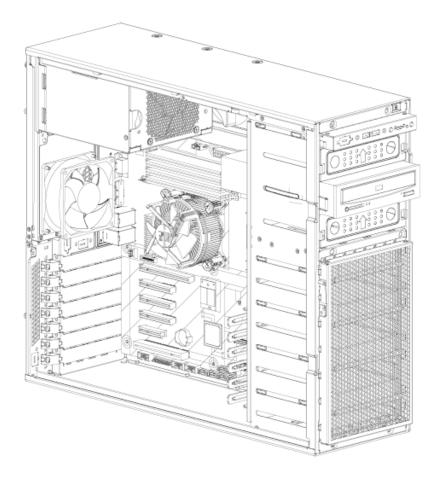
Active Heat Sink and Chassis Rear Fan in Intel® Server Chassis P4304XXSFCN
